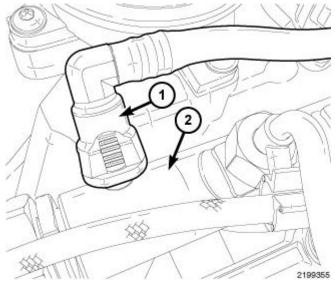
Fuel Return Line & Fuel Rail Courtesy of CHRYSLER LLC
